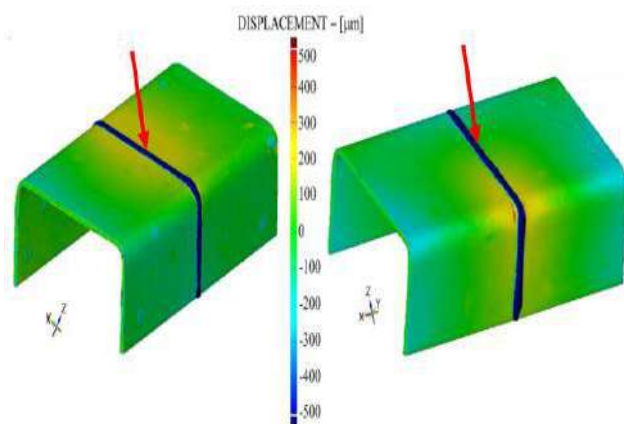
Point displacement/distortion: ASTM-S6 and ASTM-S3 welded group. Red Arrow indicates de welding bead.
